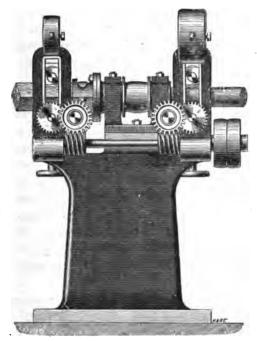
AUTOMATIC ROUNDING MACHINE.
